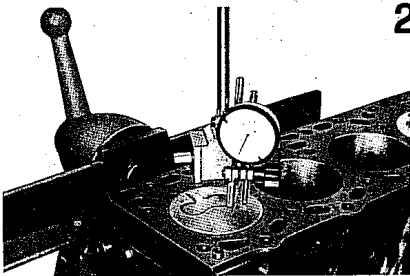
Checking squareness of connecting rod, piston assembly, by means of device A. 395363.
